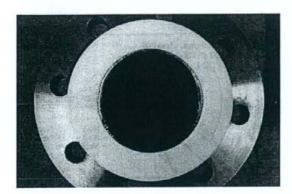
Expanded PTFE sheet gasket of NPS 4 after tightening test according to HPIS procedure.
